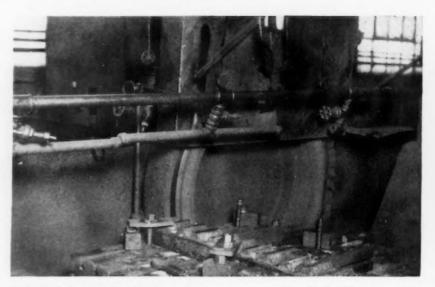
Ends of rack sections are wet ground on a machine fitted with reciprocating platen and a 44-in, sectional wheel. The same machine is used to surface the bottom of the racks
